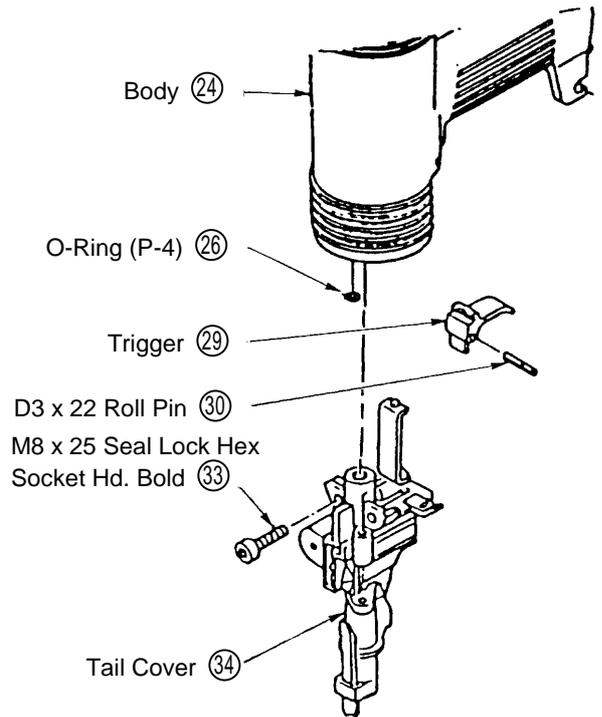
Disassembly and Reassembly of the Tail Cover and Related Parts
